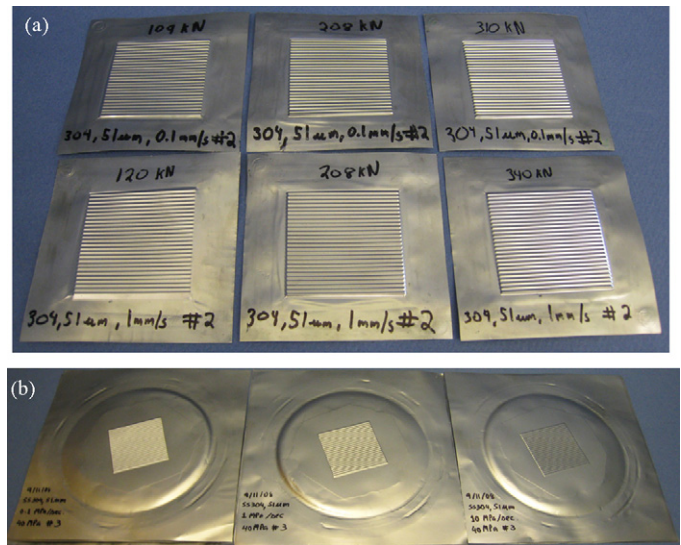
Samples of (a) stamped, and (b) hydroformed specimens.
